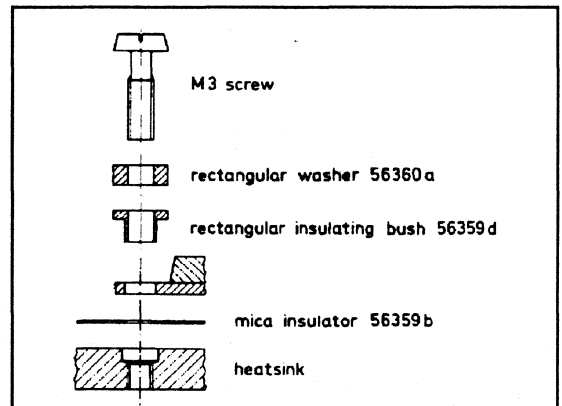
Insulated screw mounting with rectangular washer into tapped heatsink.
